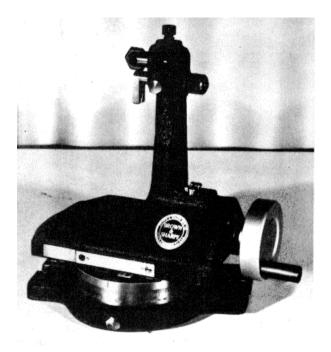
I. Radius and Angle Wheel Truing Attachment. The slide is clamped at the required radius, the diamond tool is set by the gage just below it and the slide is swiveled to form the wheel.
